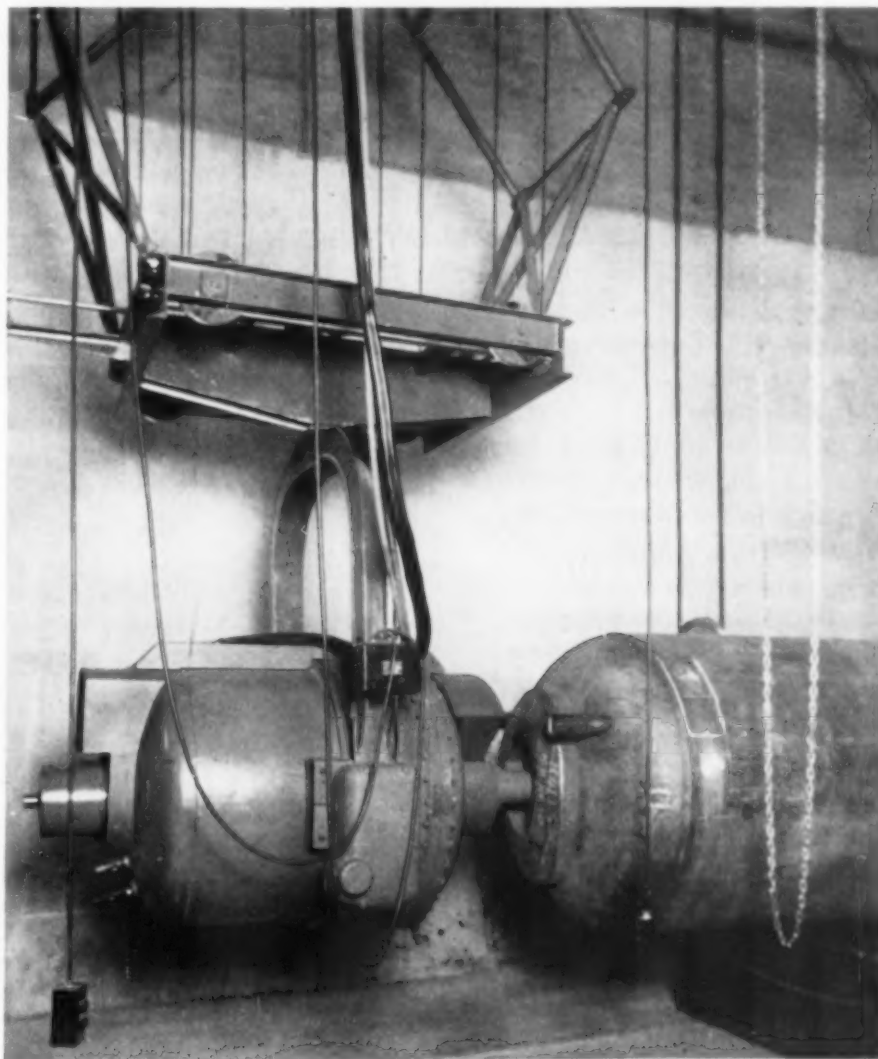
1,000,000-Volt Tube and Universal Suspension. Focal spot is at end of 2-ft. tube projecting through end opening of boiler. Radiating in all directions, this position enables the entire circumferential seam between head and body to be radiographed at one time
